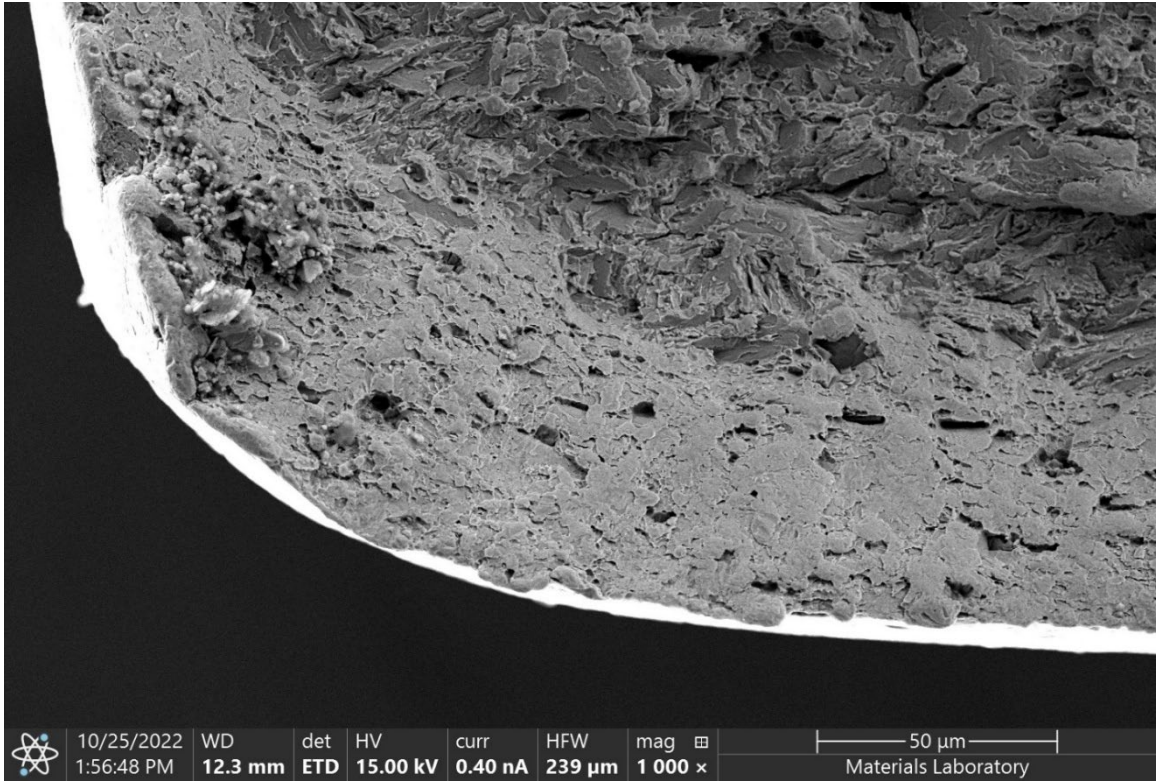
Closer view of the washer fracture, showing woody or fibrous fracture features.
